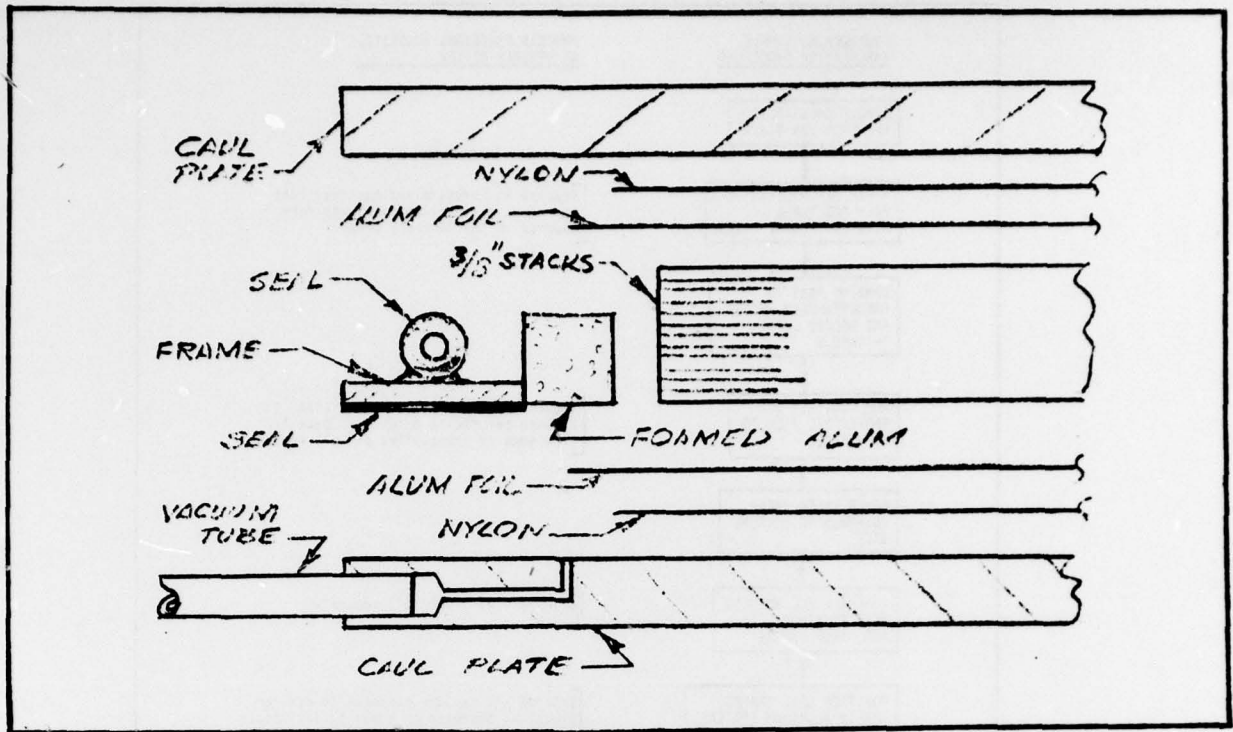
MOLDING ASSEMBLY, 3/8 INCH PANELS
